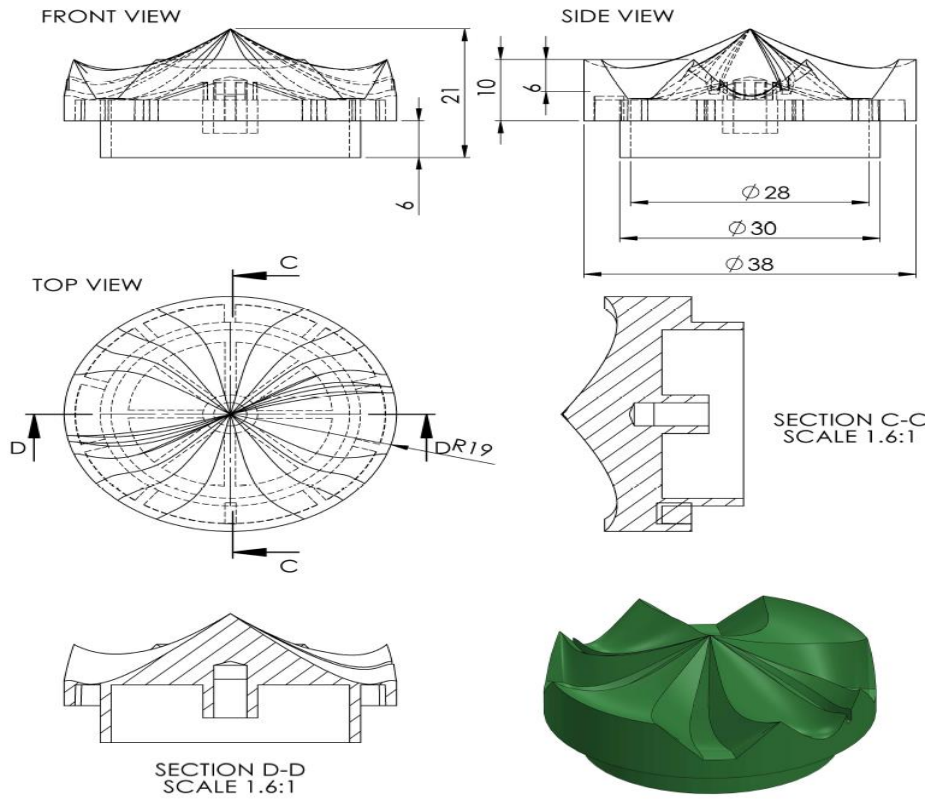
Design Drawings for spinner 6 Groove Deflection Plate
